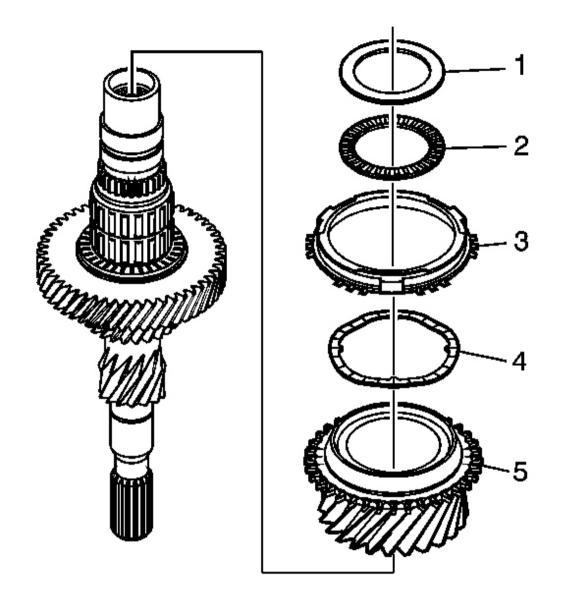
Exploded View Of Input Shaft Assembly Courtesy of GENERAL MOTORS CORP.
